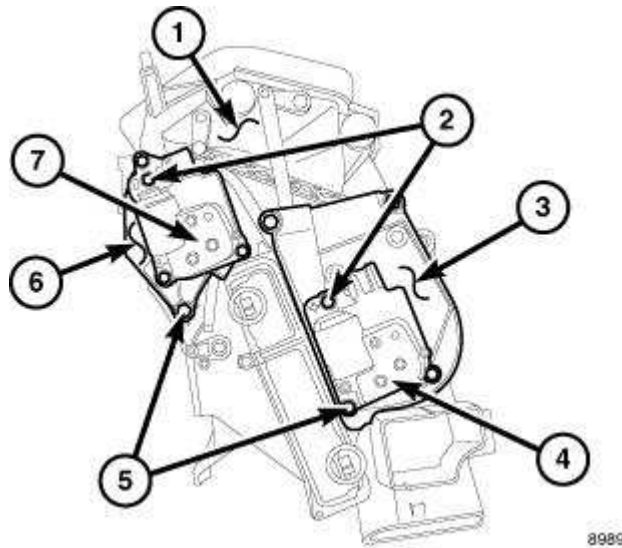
Air Housing-Actuators and Brackets-LH Removal & Installation
